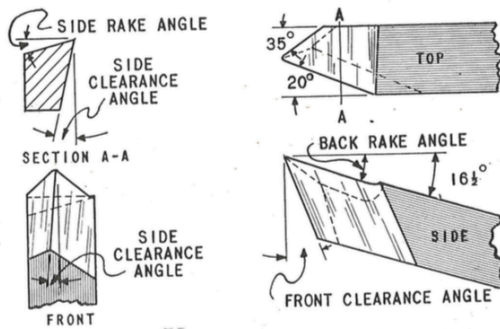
Excellent R. H. Tool for general turning and shouldering toward headstock; also facing. Point should be rounded for finishing work.
